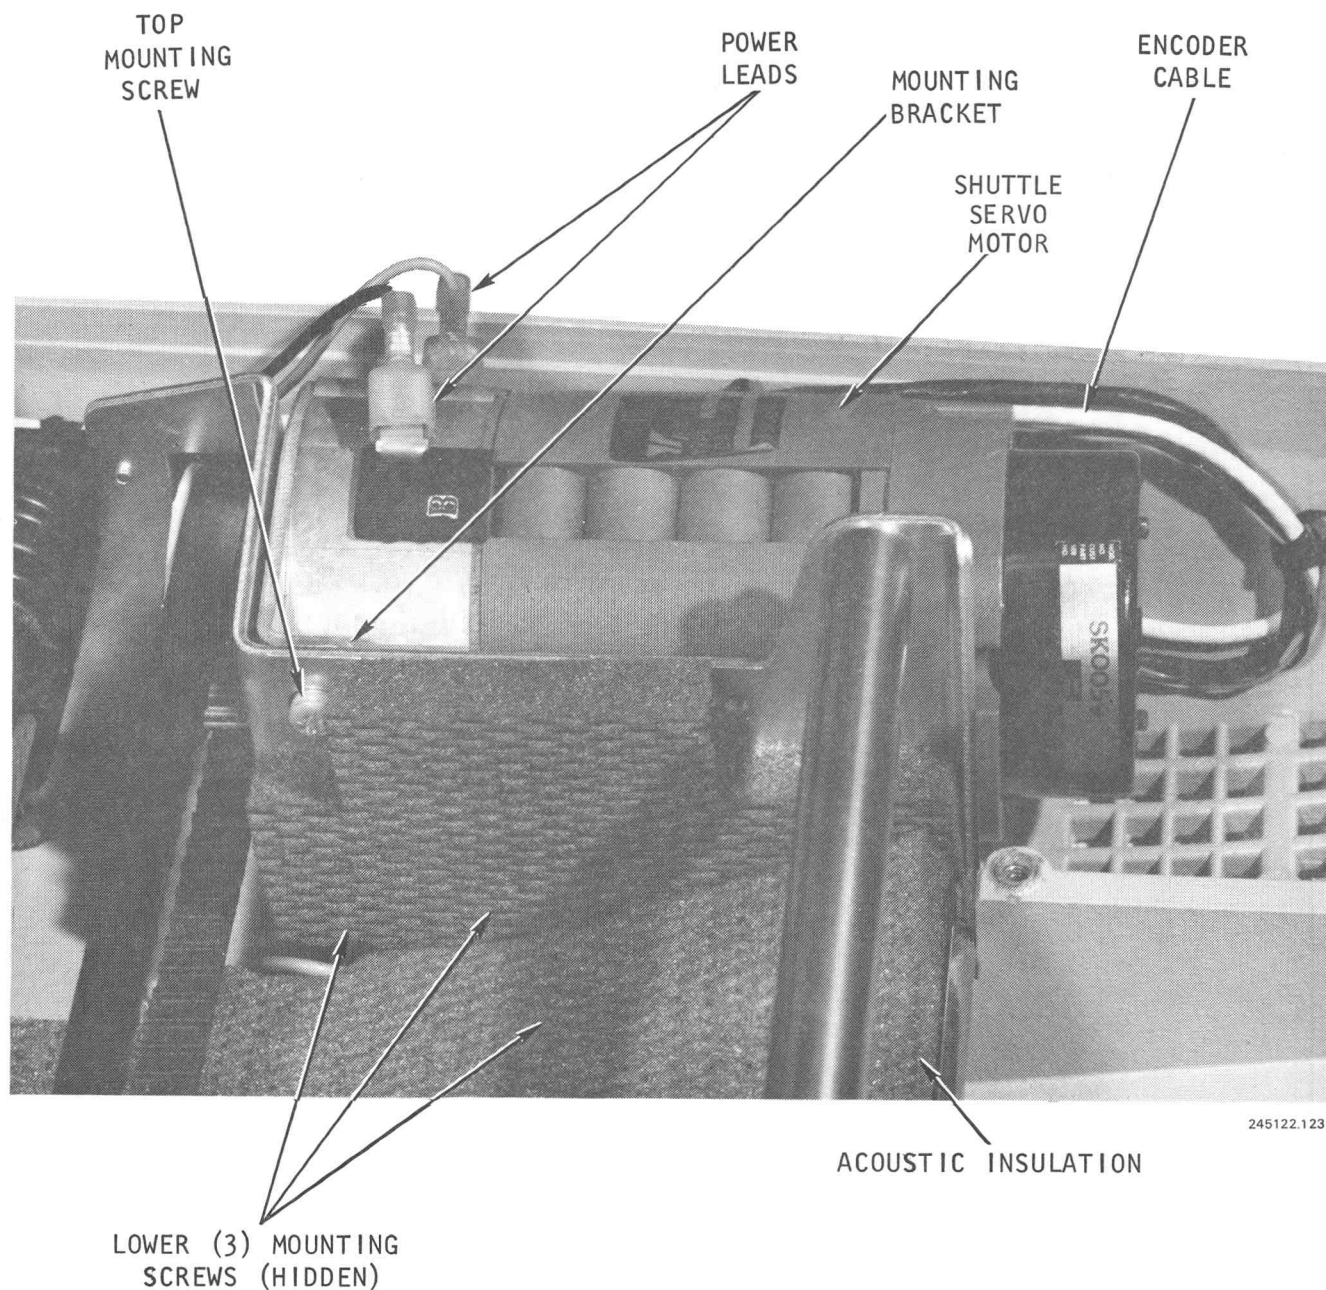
Shuttle Servo Motor (Shuttle Drive Control Assembly) Removal/Replacement
